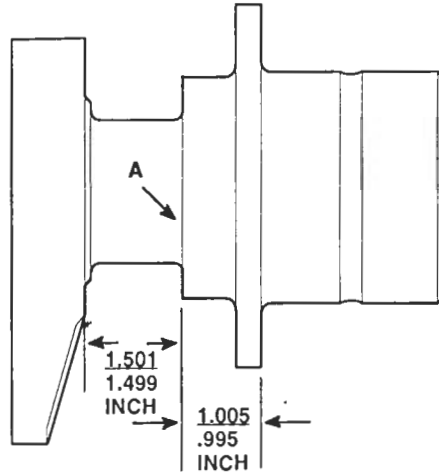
Standard Dimensions at Crankshaft Thrust Surfaces
